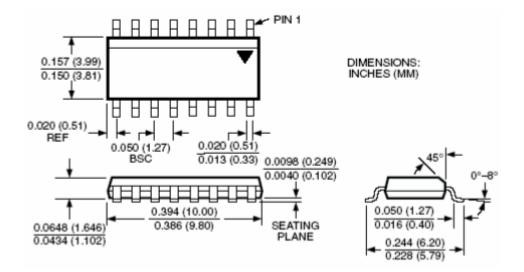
CY808 SOP-16 Package Outline Dimensions shown in millimeters and (inches)
